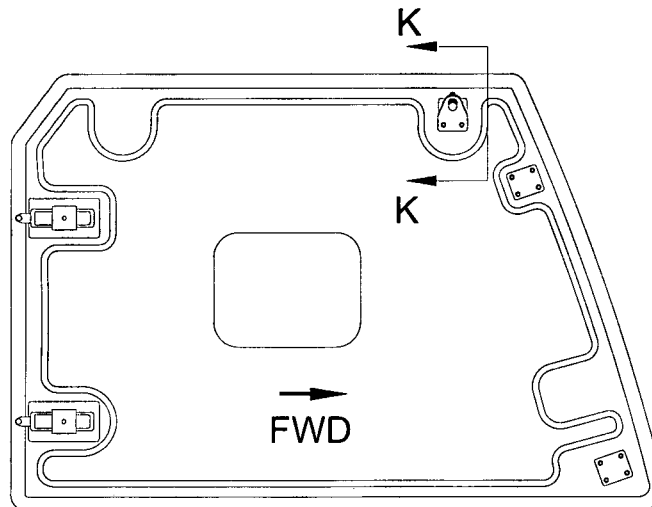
(b). HINGE BRACKET POSITION ON RH D3186-2 SPACEPOD DOOR
